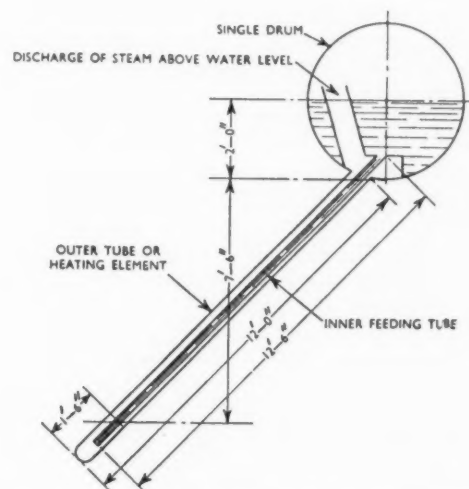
MODIFICATION OF STANDARD U-TUBE BOILER
